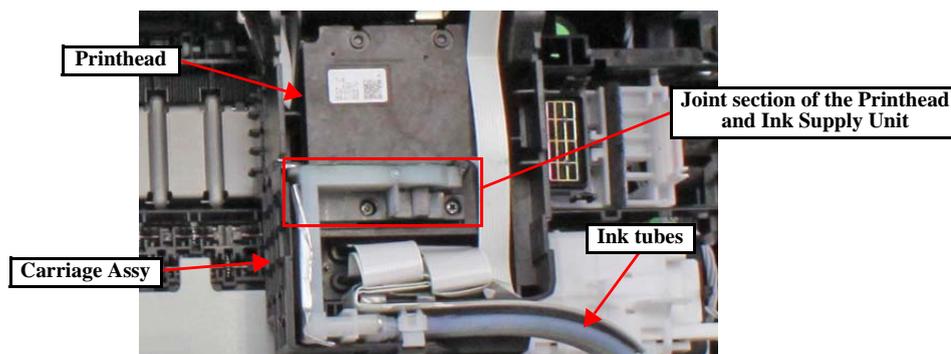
Joint Section of the Printhead and Ink Supply Unit
